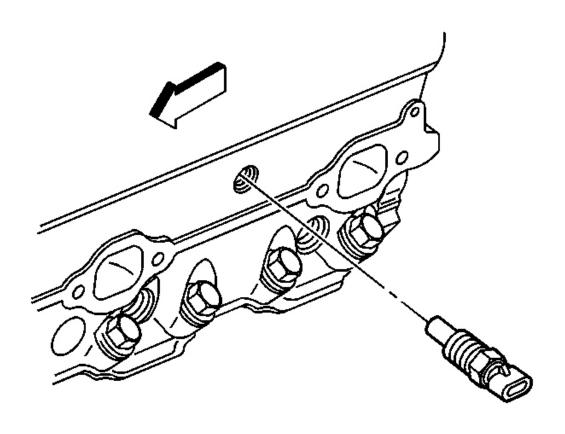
View Of Engine Coolant Temperature Sensor Courtesy of GENERAL MOTORS CORP.
